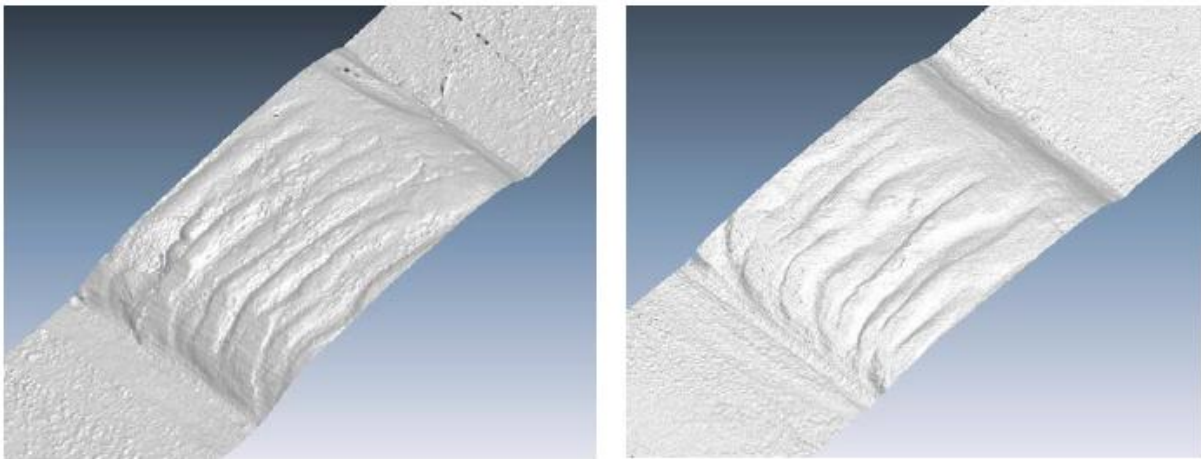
Laser scan of typical weld surfaces in as welded (left) and UP treated condition (right), (von Selle, Doerk, Kang, Kim, 2011)
